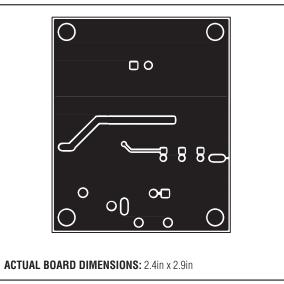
MAX4295 EV Kit PC Board Layout—Solder Side
